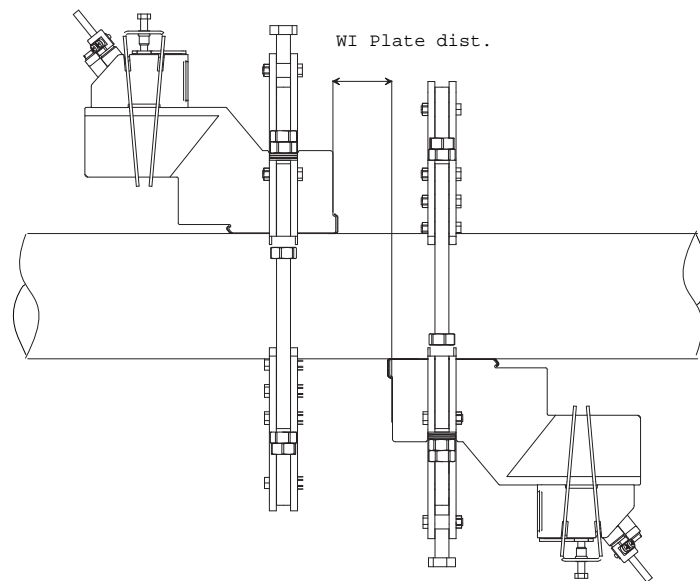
Mounting of the second coupling plate to the pipe mounting fixture (mounting with threaded rods)
